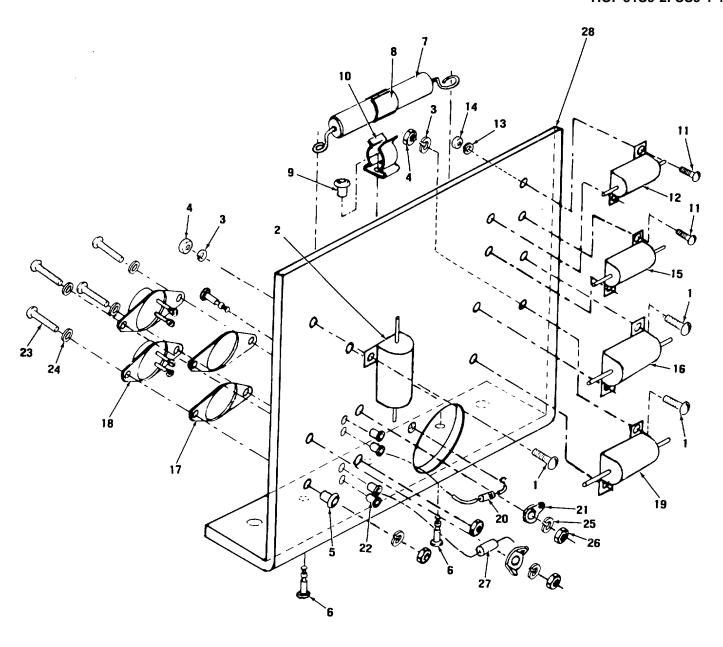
Monitor, Cabinet, Type C (CY-7361) Printed Wiring Board Mounting Plate
